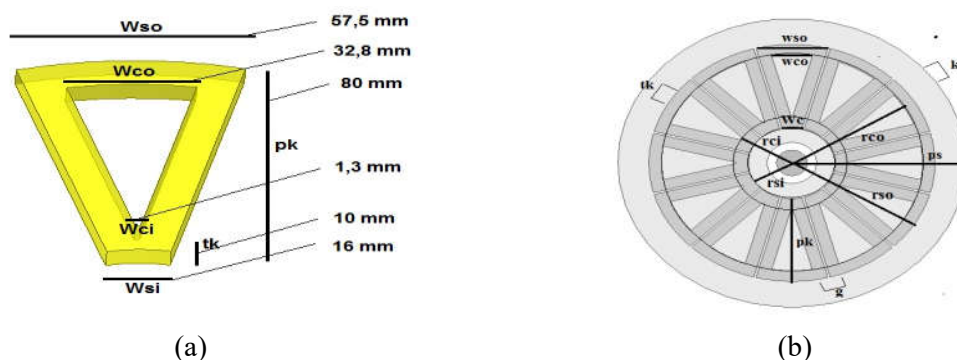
(a) Design of winding coil with trapezoidal shape, (b) design of winding stator casing.
